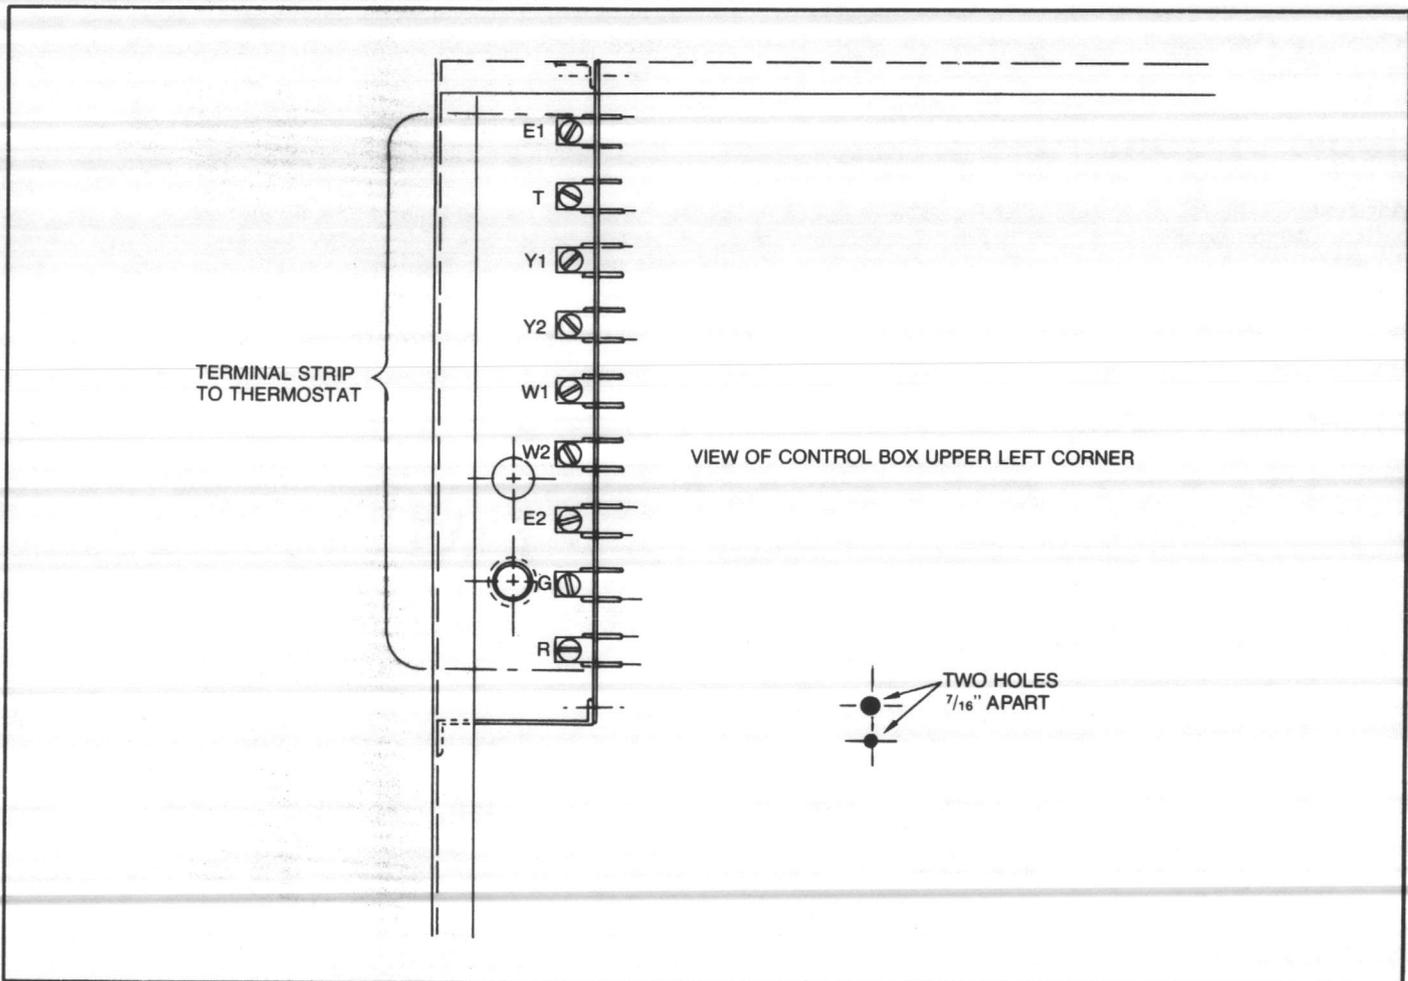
A Typical View of Two Holes Near Control Box Terminal Strip
